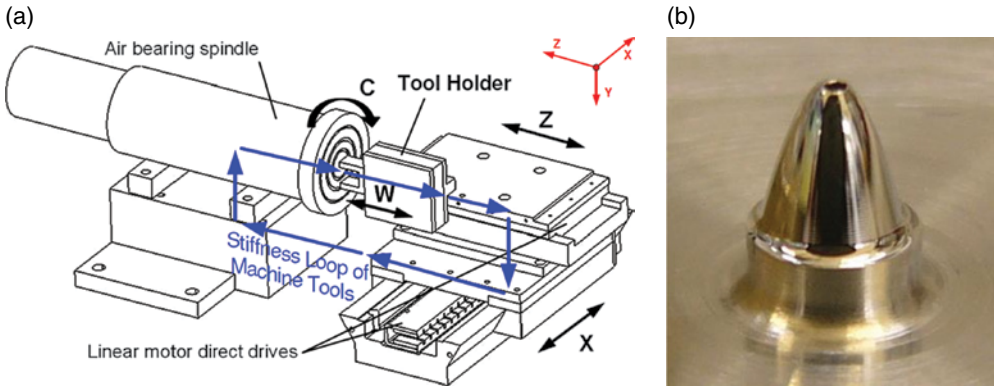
The diamond turning machine tool equipped with the FTS. (a) schematic of the machine (b) component micro turned by diamond tools
